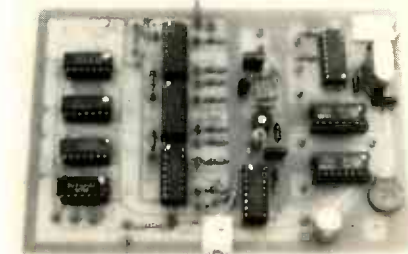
HOW PARTS ARE POSITIONED ON the digital board. Follow text for wiring sequence for easier assembly. Don't forget the jumpers that are on the foil side of the board.
